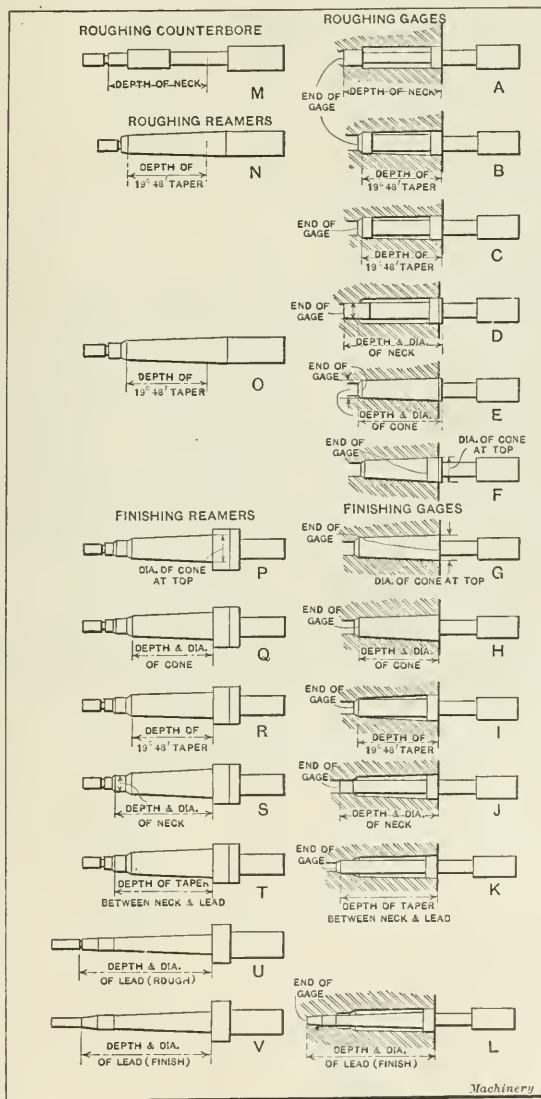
Tools and Gages used in machining Cartridge Chamber in Military Rifle Barrel, illustrating Another Method of Progressive Gaging
